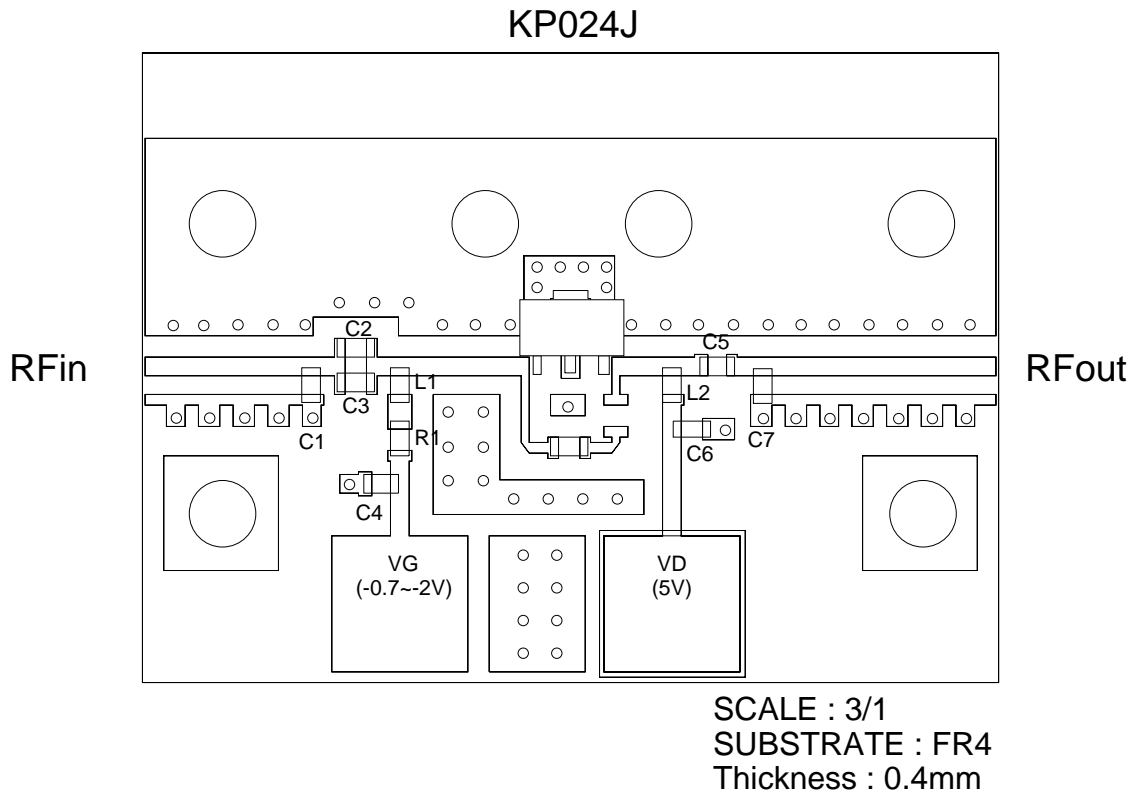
Pout.(freq:2110~2170MHz) test fixture (top view) for P0110004P
